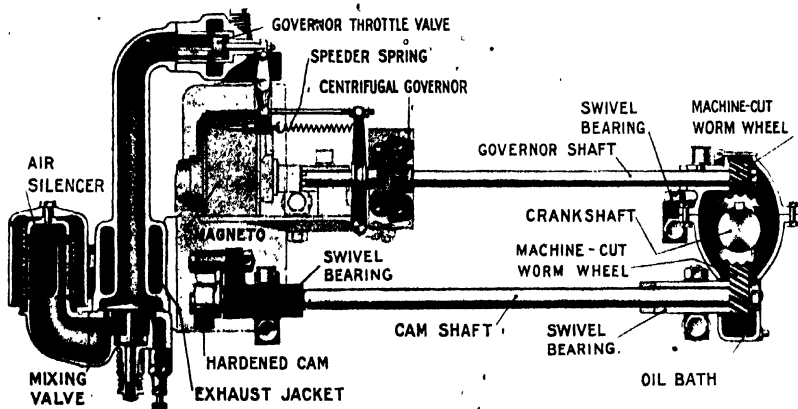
SHOWING ARRANGEMENT OF GEAR AND SECTION THROUGH VAPORISER OF PETROL-PARAFFIN ENGINE. [*Crossley*.]
